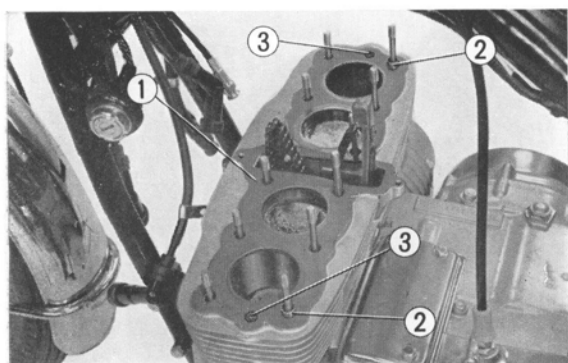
① Cylinder head gasket ② Dowel pins ③ O-rings
